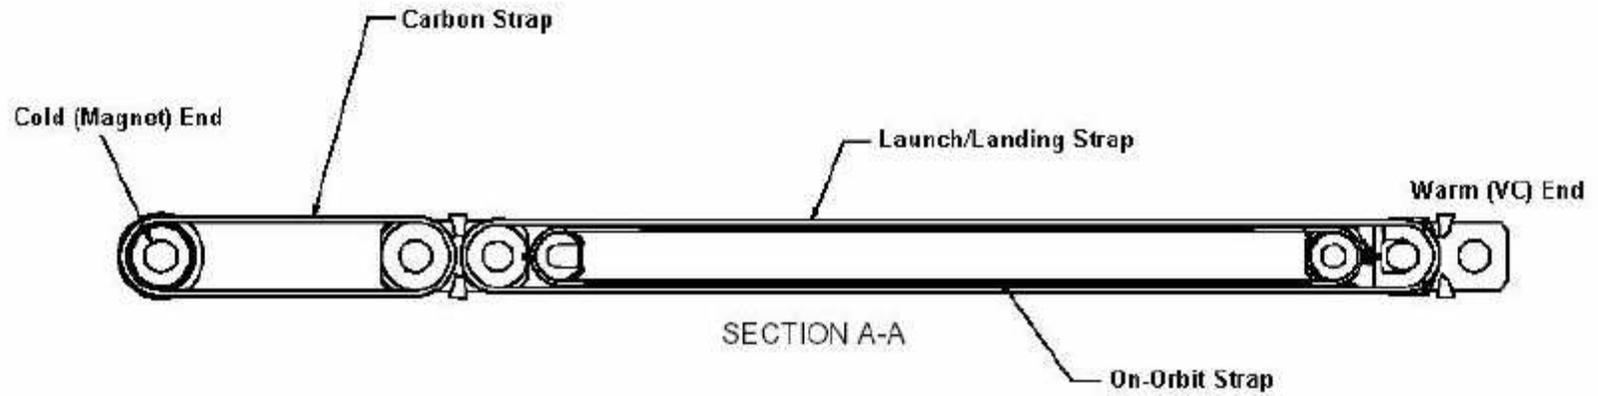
Side view of individual magnet support strap (without glass bod and wineglass assembly with Bellville washers)
